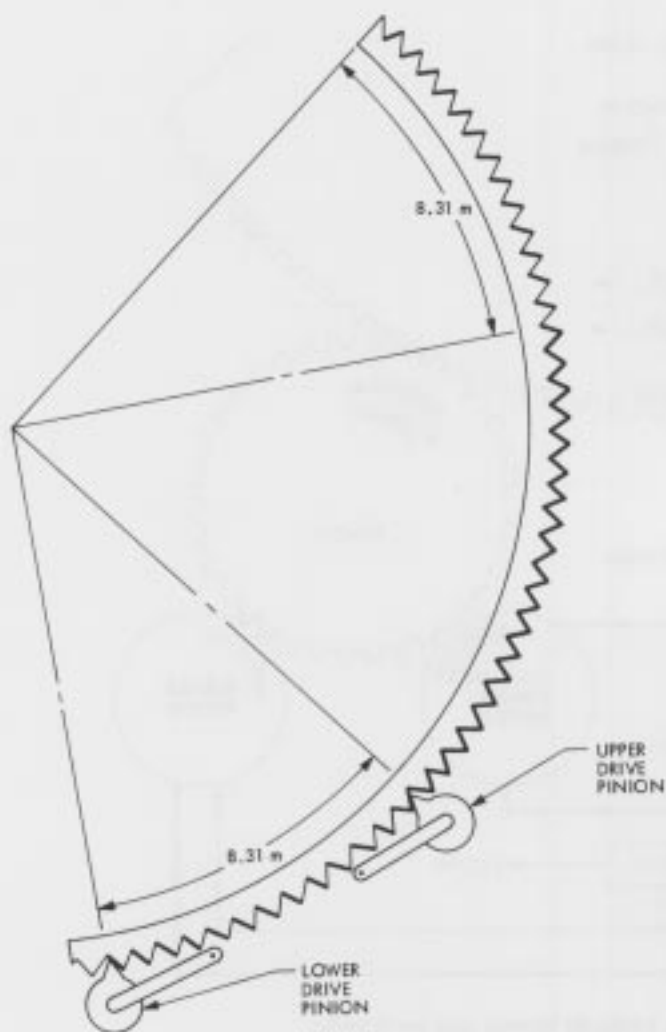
Schematic of bull gear showing, by heavy lines, the tooth surfaces subjected to counter torque loading
